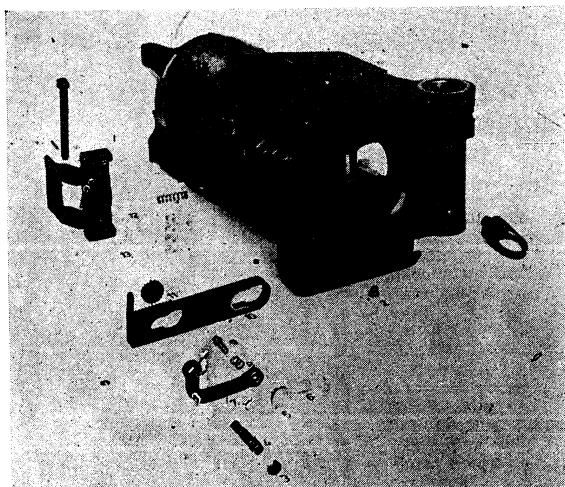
BREECHRING WITH BARREL AND HYDRAULIC RECOIL
